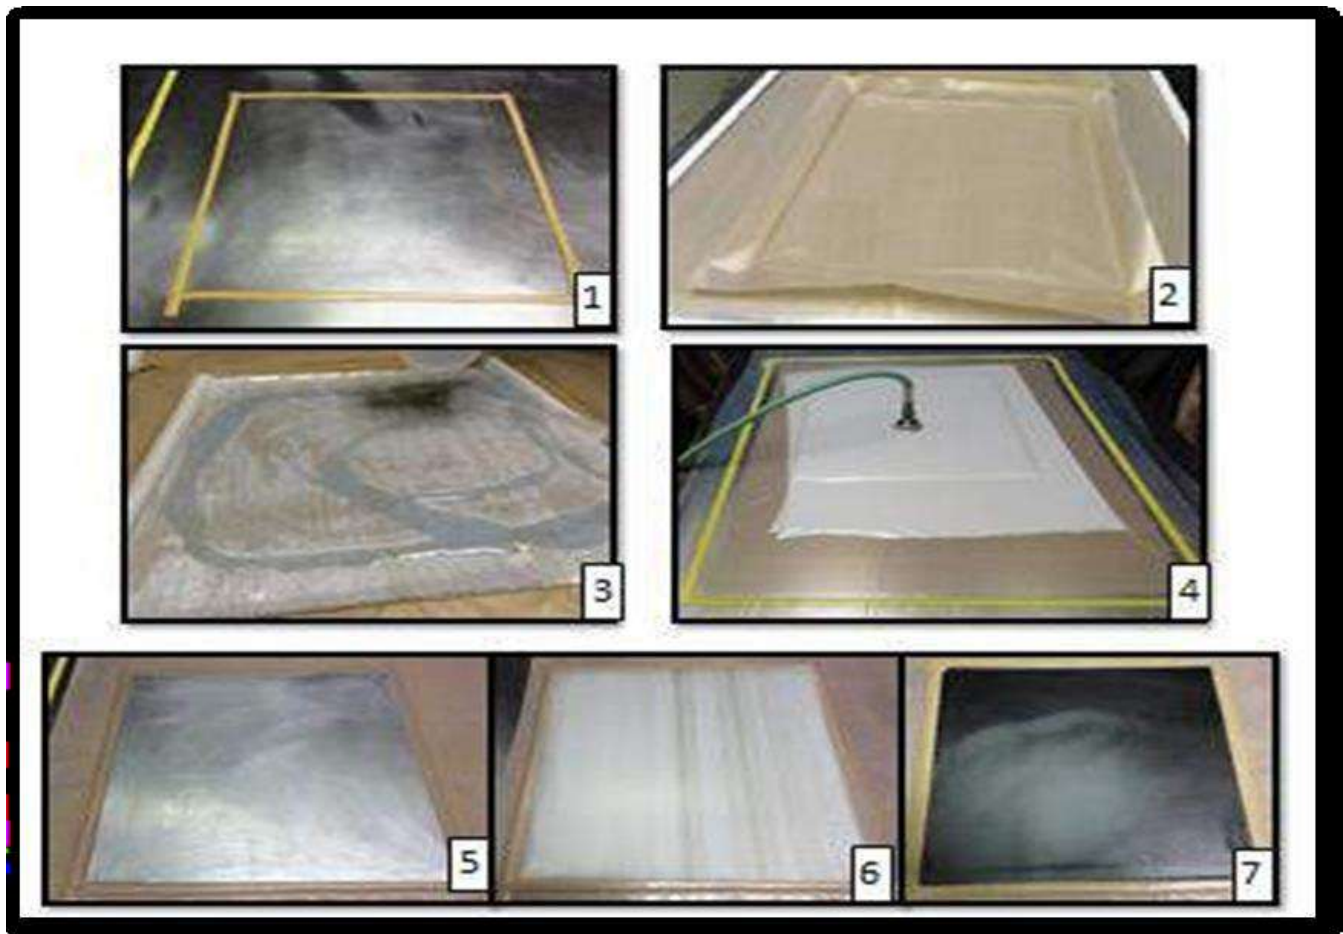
Panel Fabrication for Tensile Test and mad tensile specimen
